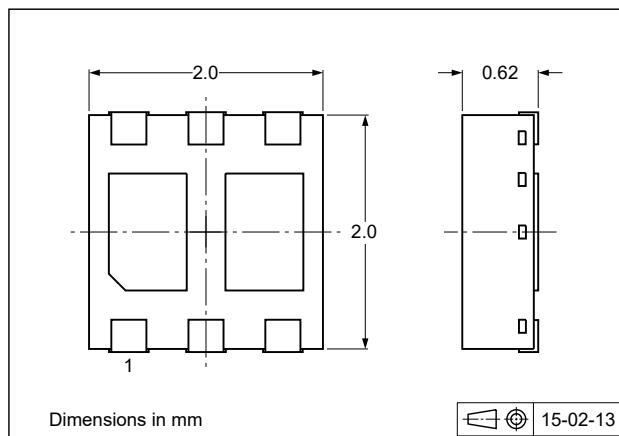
Package outline DFN2020D-6 (SOT1118D)
